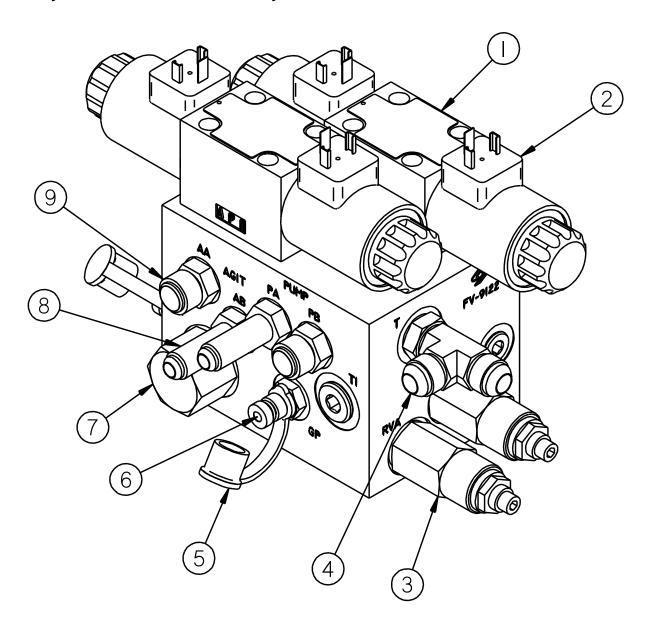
Hydraulic Control Valve Assembly: PN 45420
